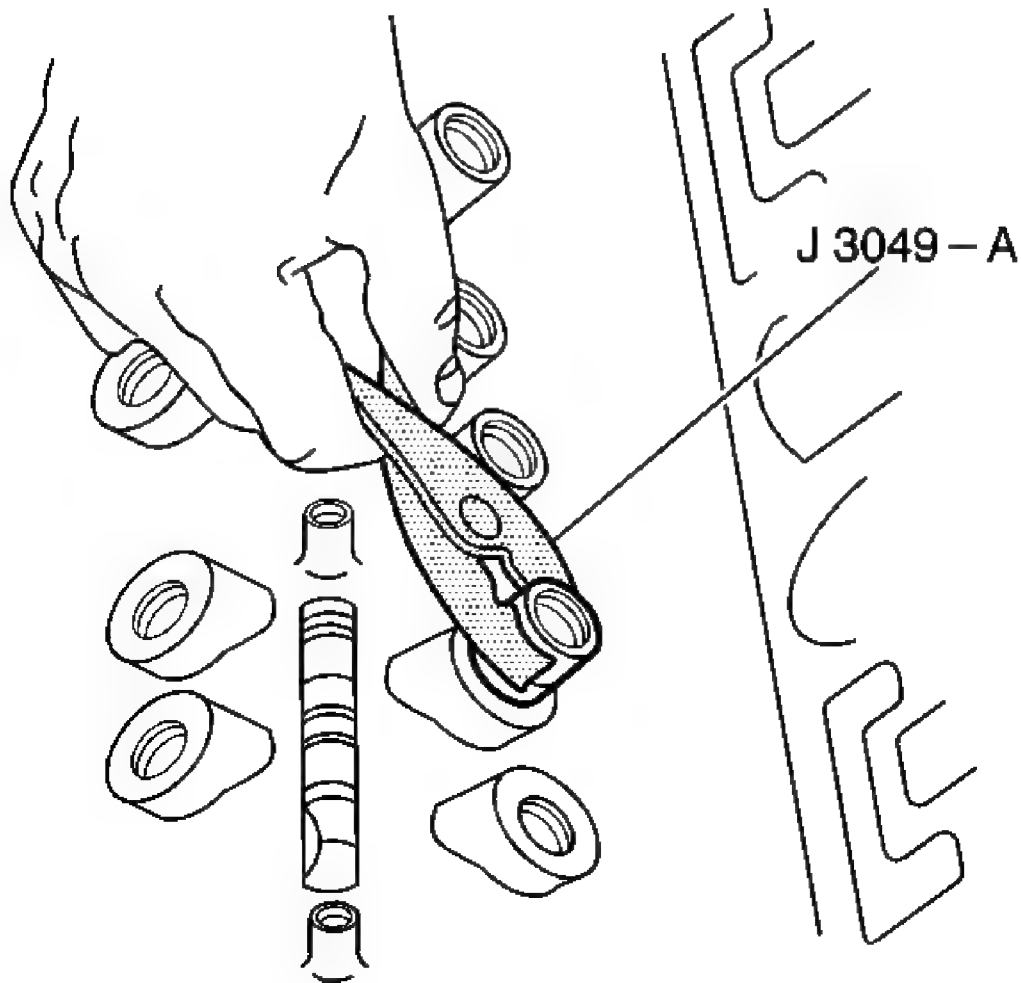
Using J 3049-A To Remove The Stuck Valve Lifters
